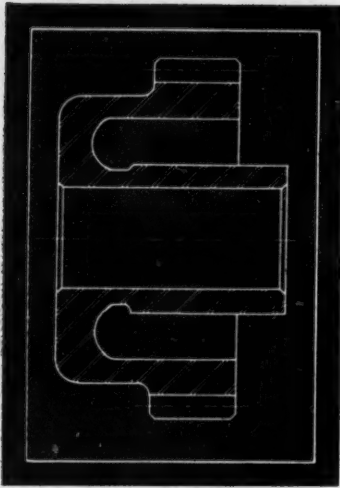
Left — Aircraft engine reduction drive pinion presents a rather difficult grinding finishing problem. Relief is a necessity at the blind end of the bore
